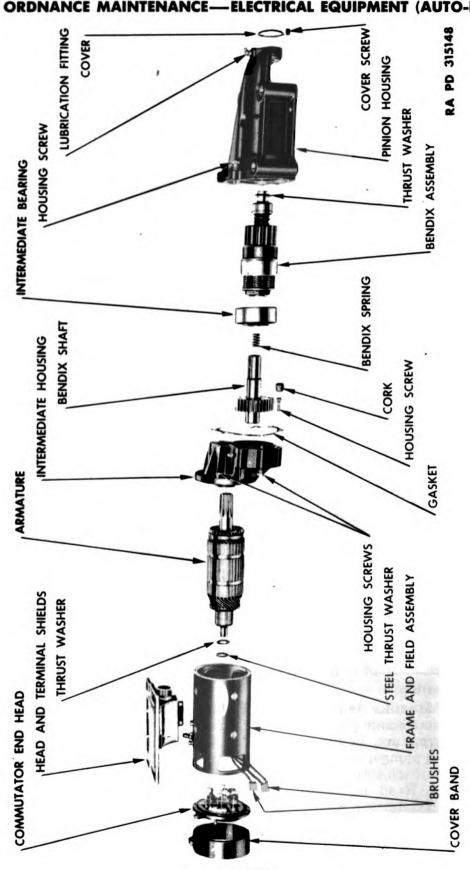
Components of MBD 4007, A, B and MBD 4010, A Cranking Motors, Partially Disassembled
